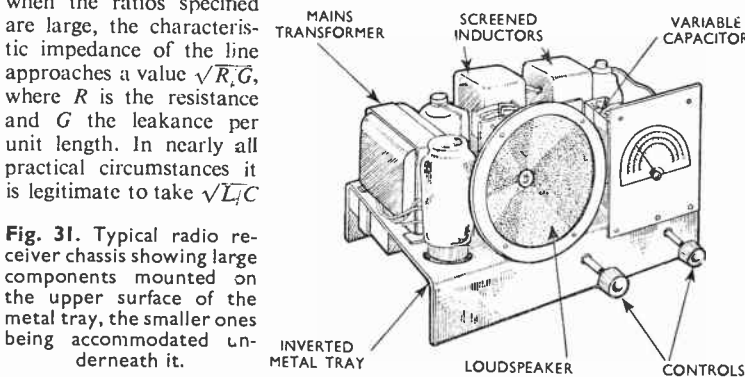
Typical radio receiver chassis showing large components mounted on the upper surface of the metal tray, the smaller ones being accommodated underneath it.
